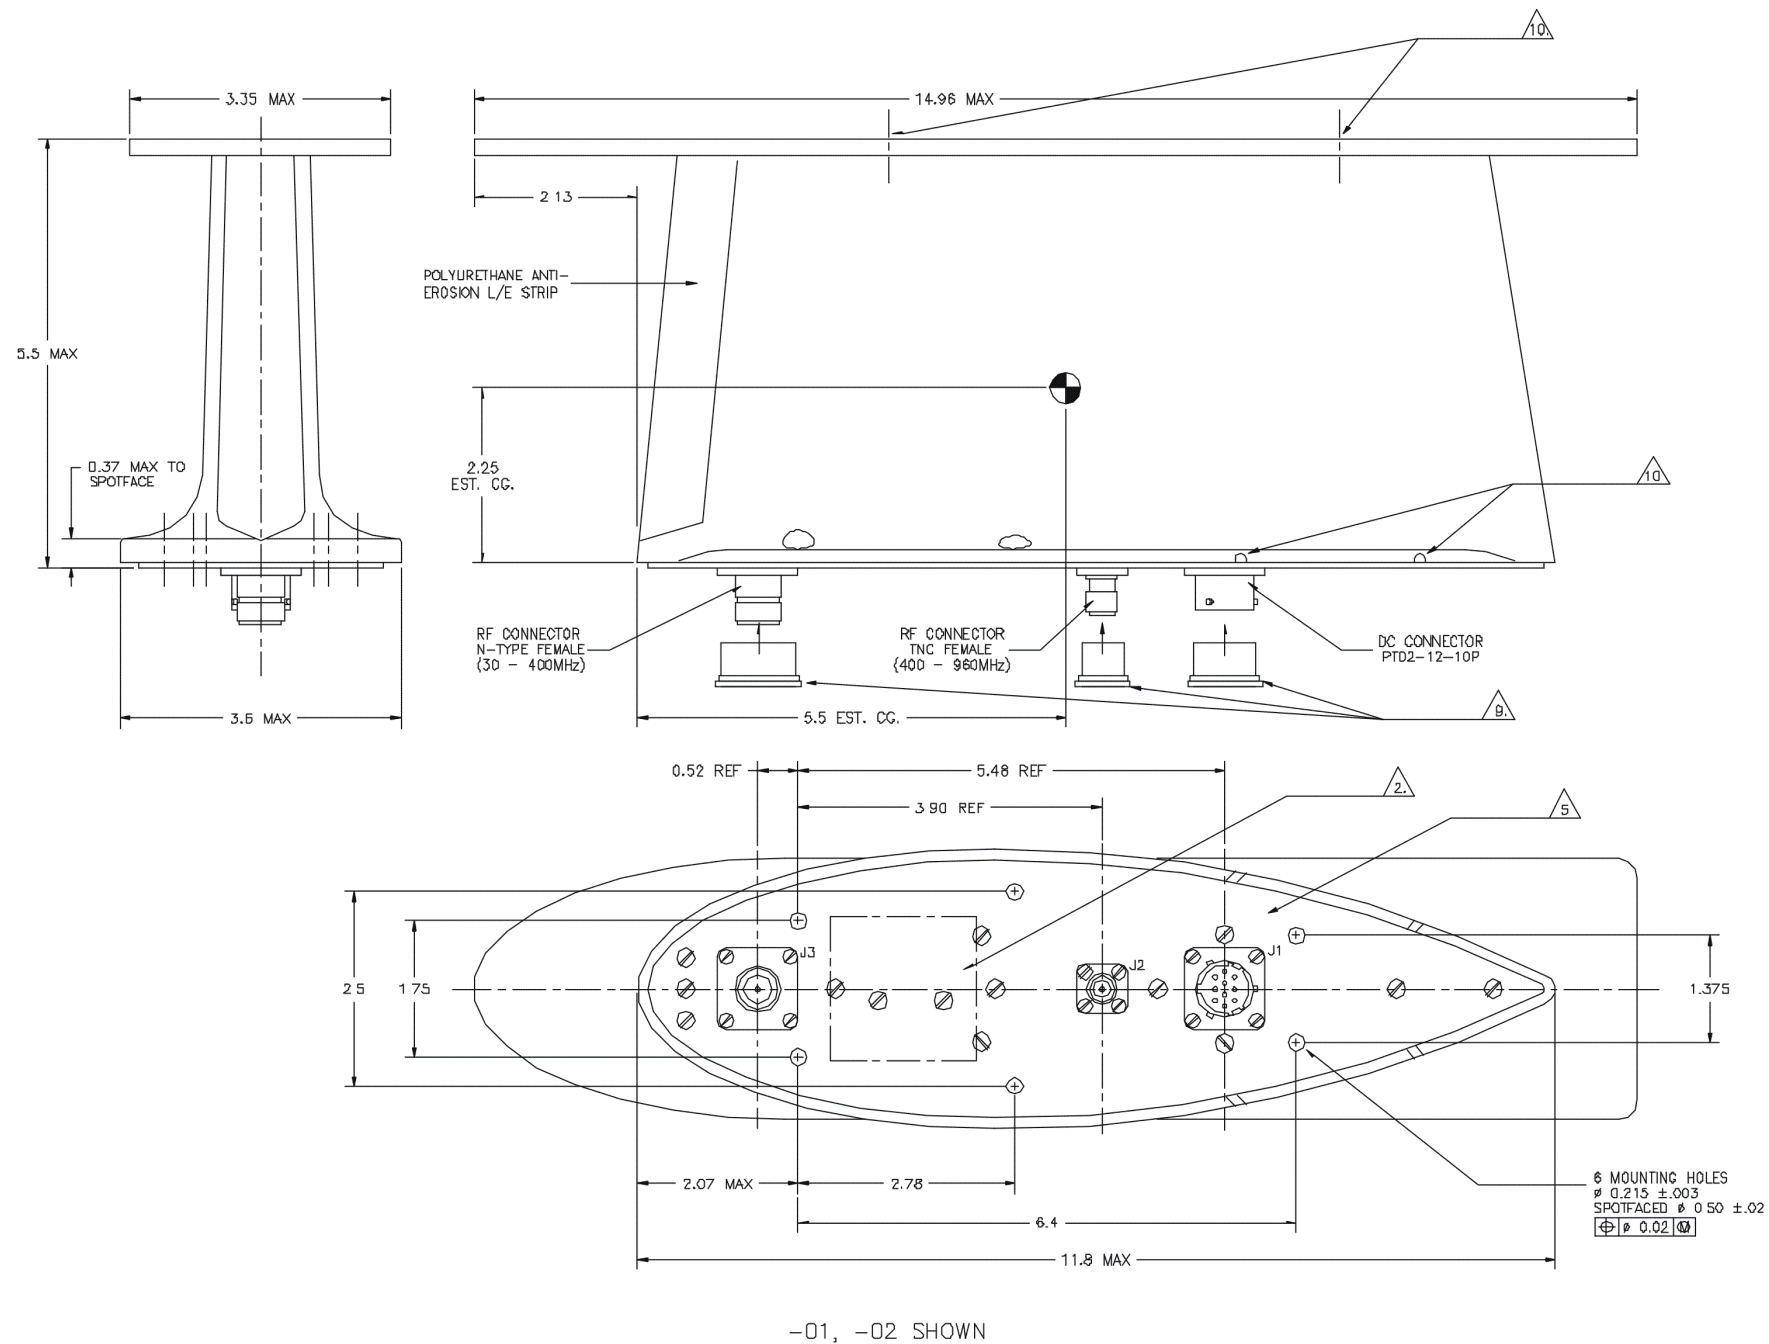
AT-160 Envelope Drawing (Sheet 1 of 1)
